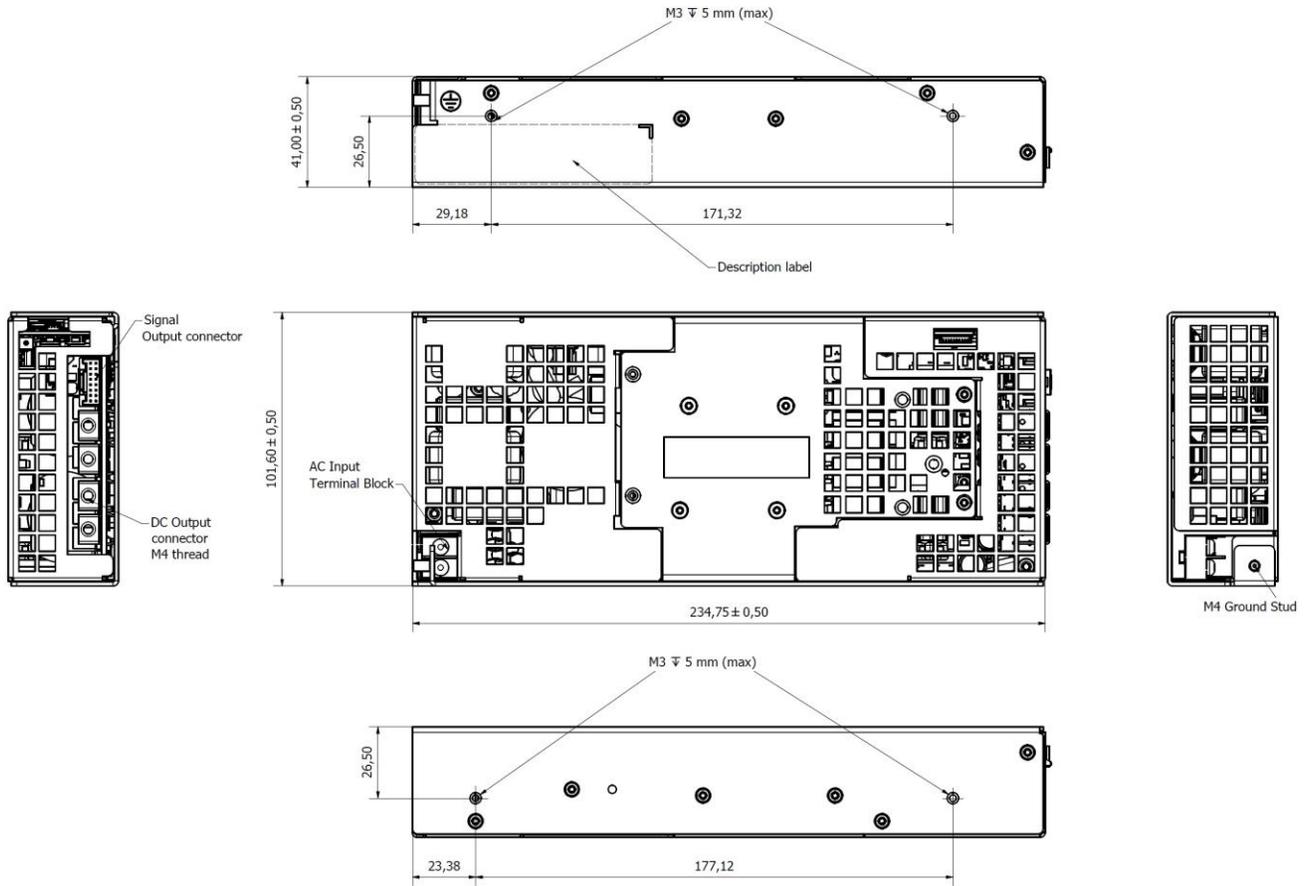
Mechanical Drawing - MBC1200-1T24-PCF Model
